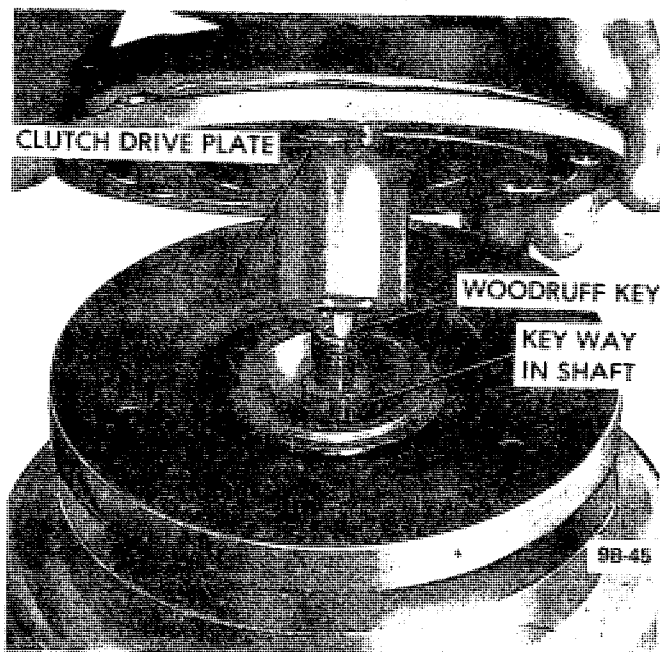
B-68 Positioning Clutch Drive Plate on Shaft - 6 Cylinder Compressor
